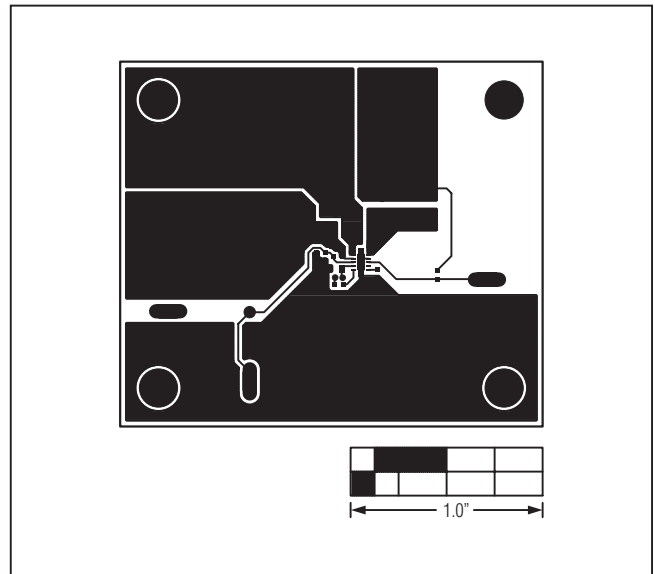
MAX17502E EV Kit PCB Layout—Component Side
